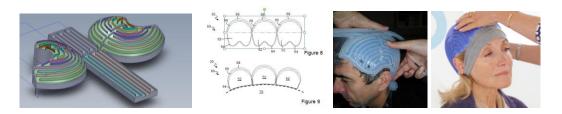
Initial tool & groove design (a) channel section (b) initial prototype (c) Cooling cap (d).
